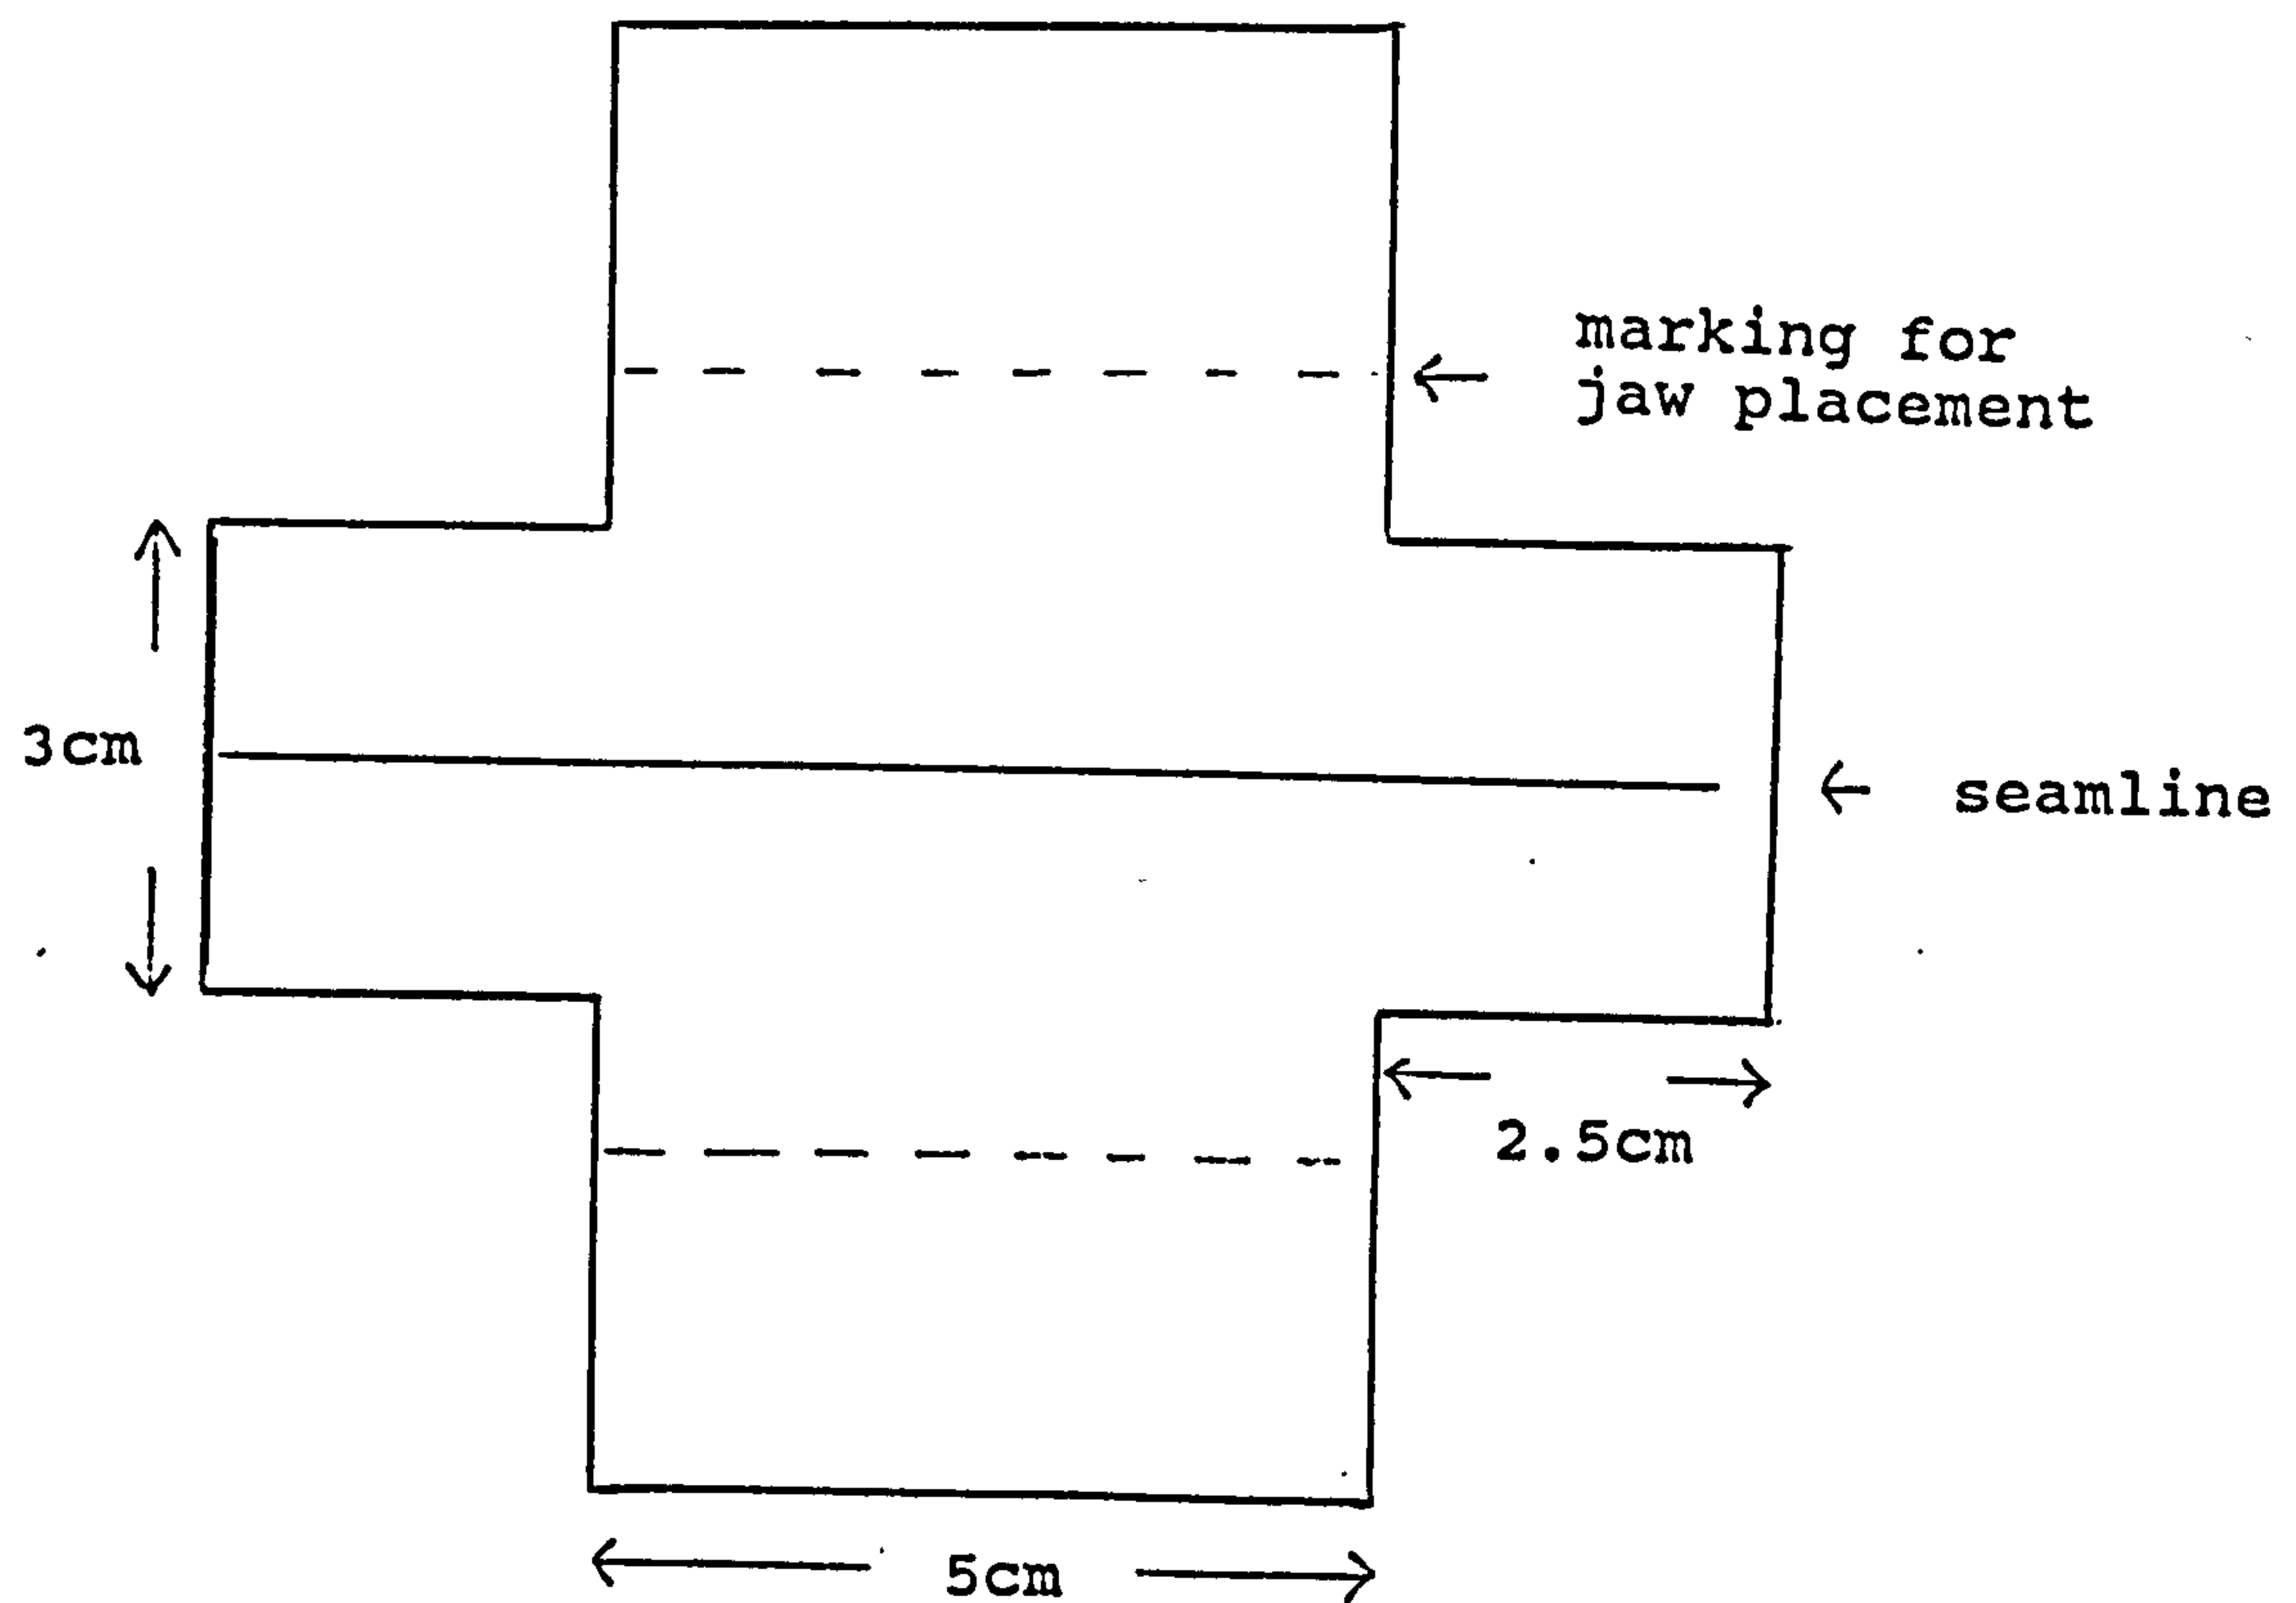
Seamed Specimen Cut in Cross-Shape
